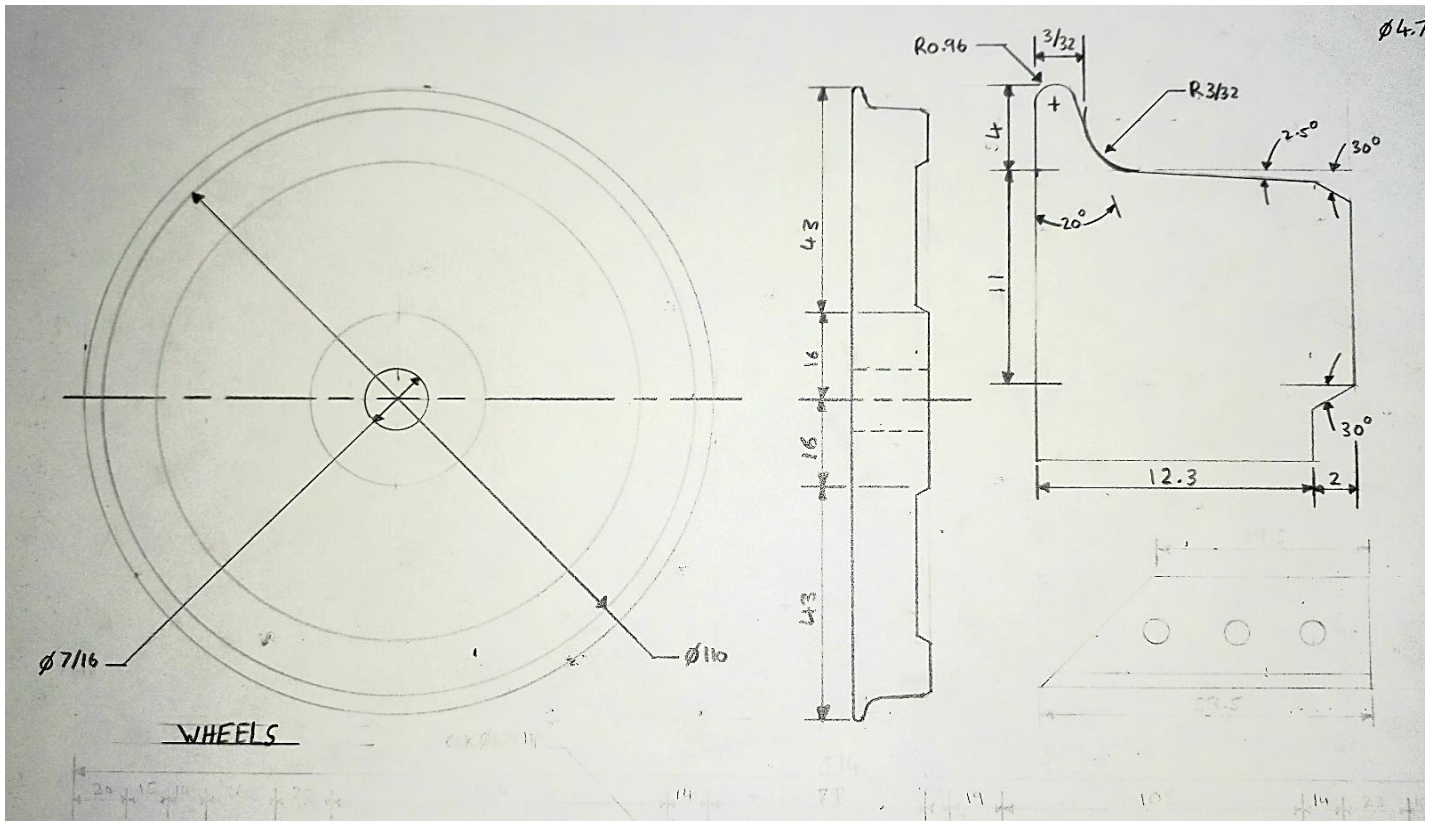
Drawings showing the wheel profile, which is identical to the standards, except the diameter is scaled from the full-size class 08 wheel.
